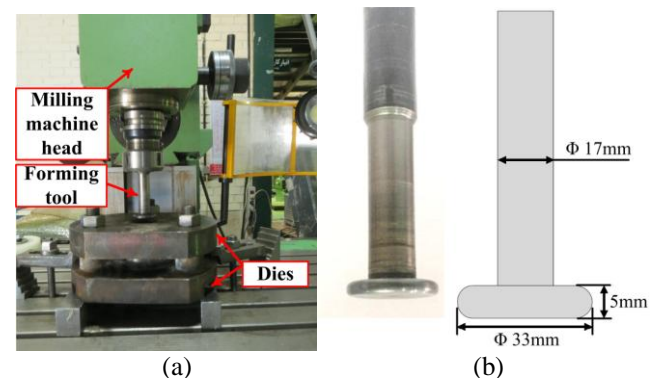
(a) Die setup on CNC milling machine, (b) Forming tool geometry
